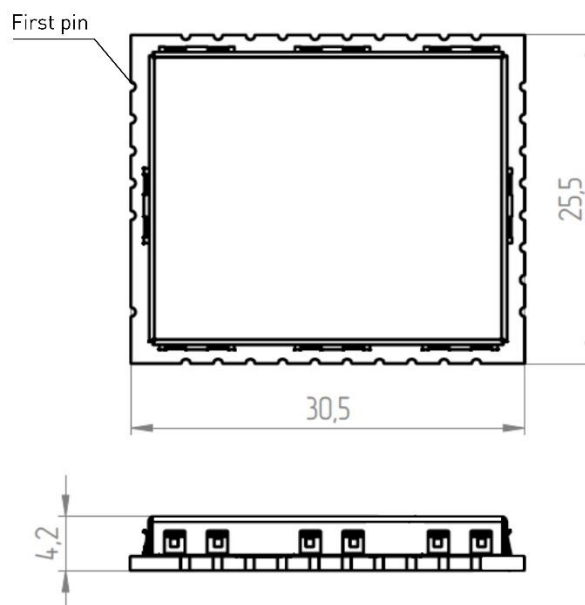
NTL102.SMT OEM module dimensions, mm
